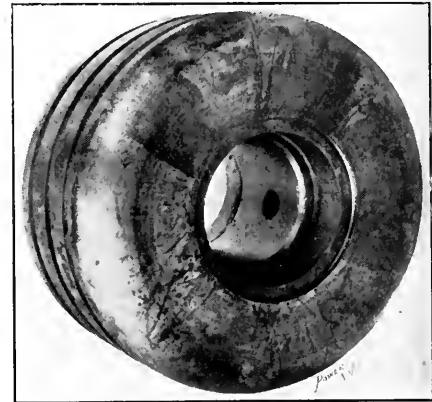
42-INCH ONE-PIECE GAS-ENGINE PISTON
